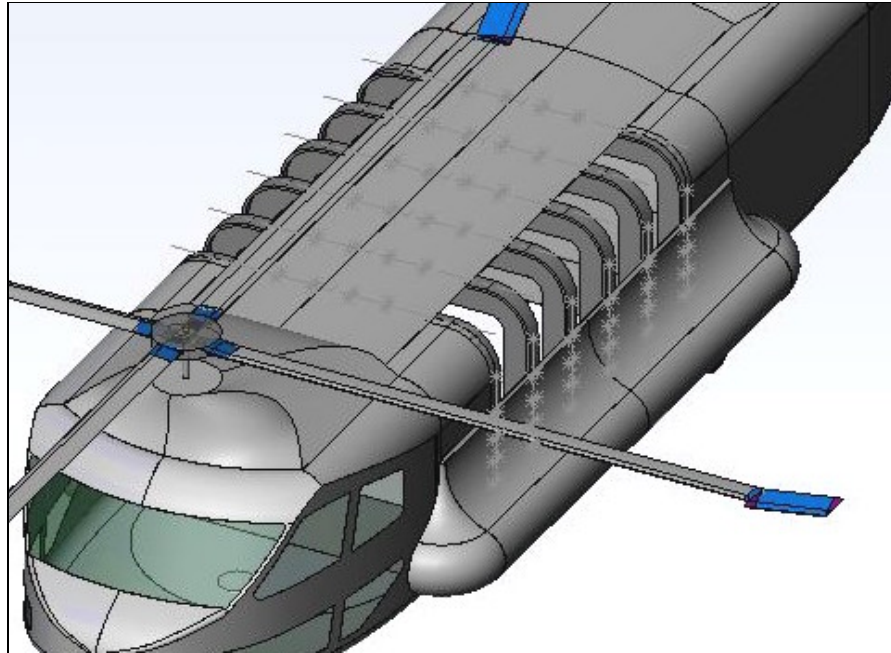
Cutaway showing fuselage frames, required to stiffen the payload bay
